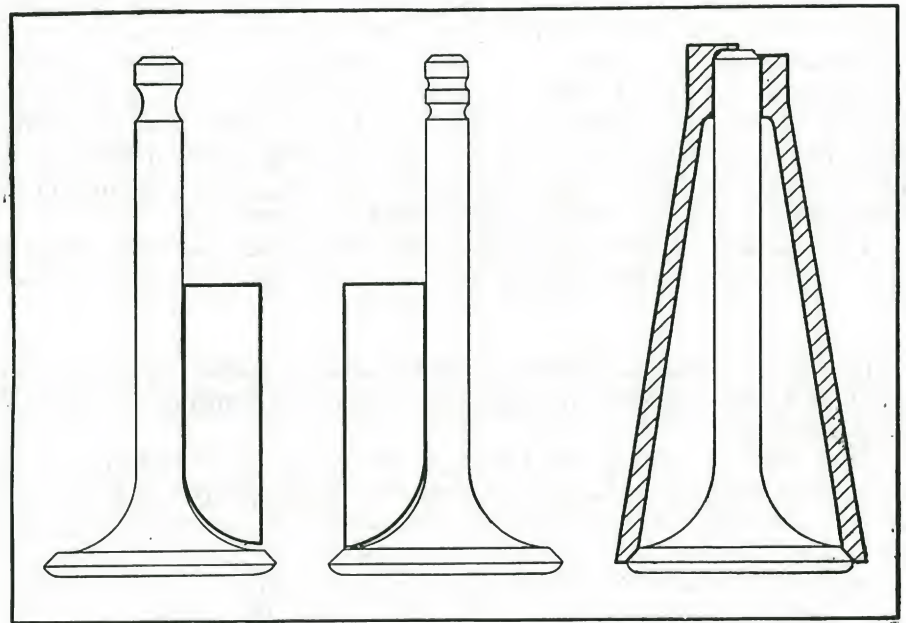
GAUGES FOR CHECKING VALVE STRETCH AND CONTOURS
